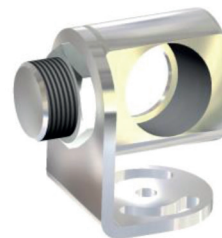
Mounting bracket, adjustable in 2 axes [TM-AB-CS]
